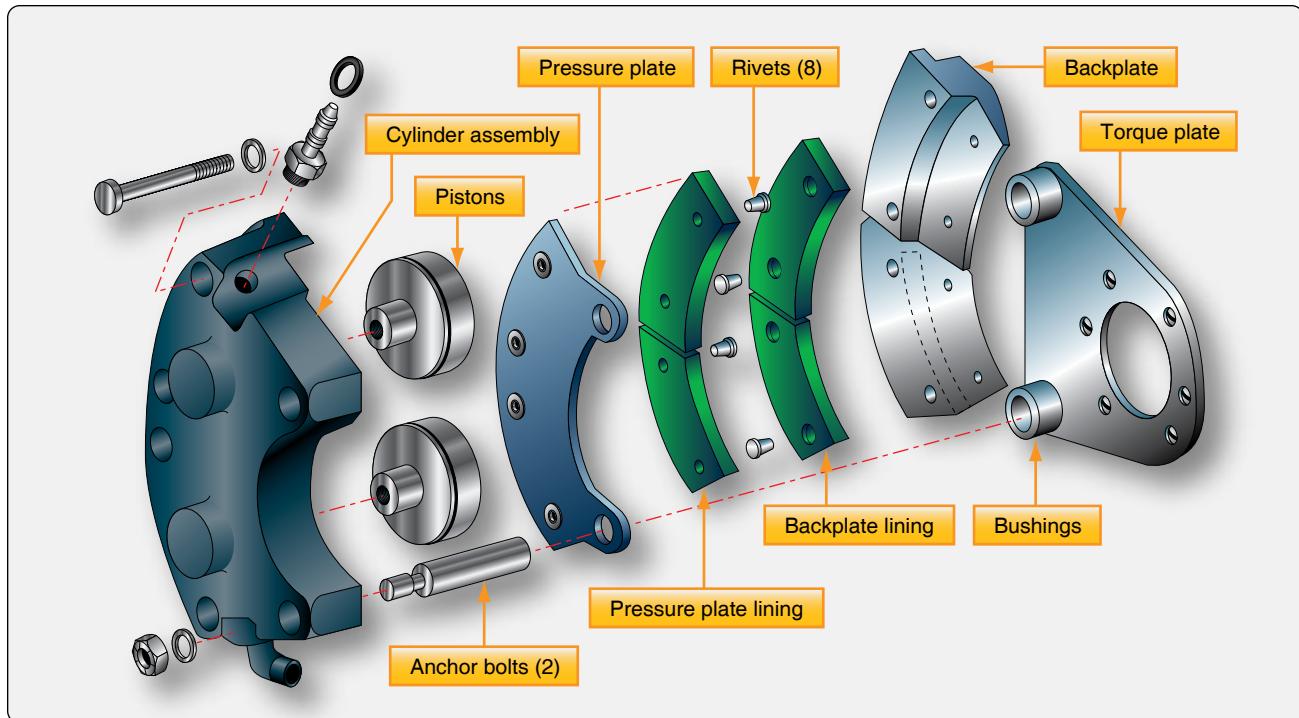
An exploded view of a dual-piston Cleveland brake assembly.
